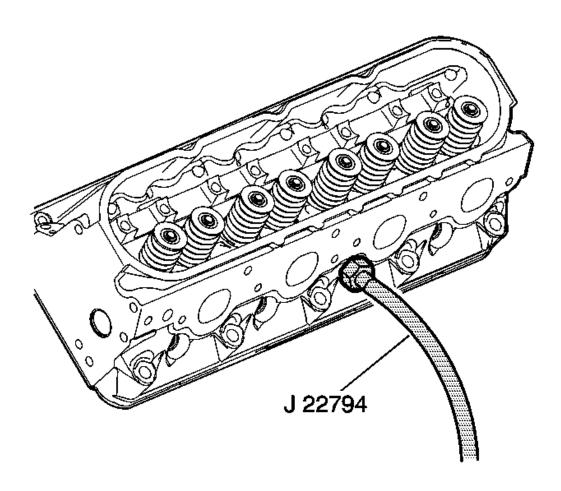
Applying Compressed Air To J 22794 Courtesy of GENERAL MOTORS CORP.
